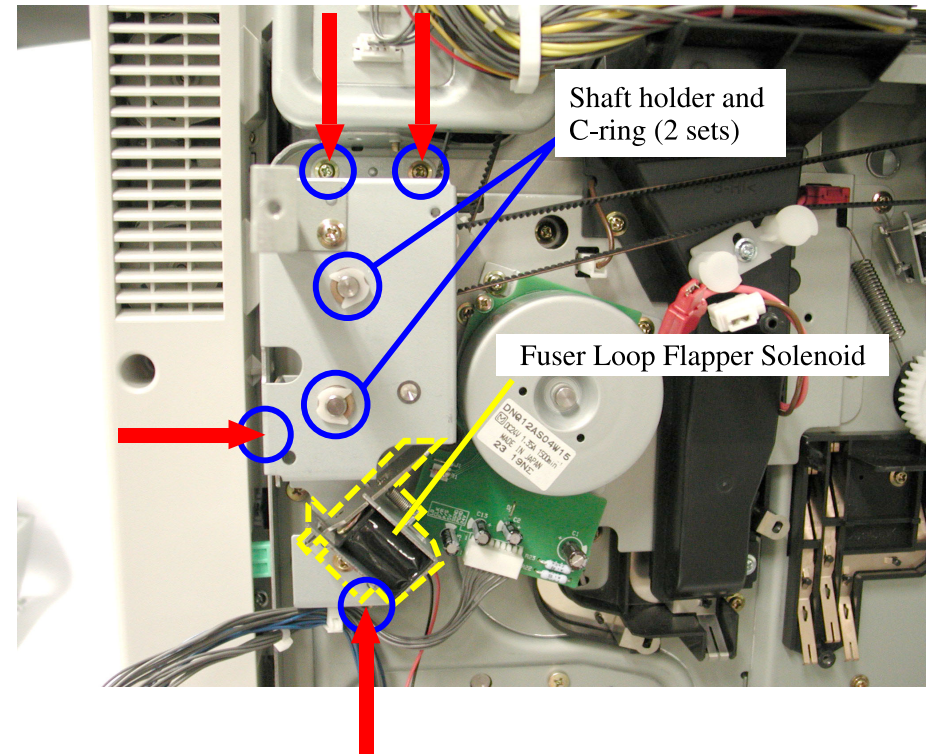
Removing the Fuser Deceleration Drive Assy
